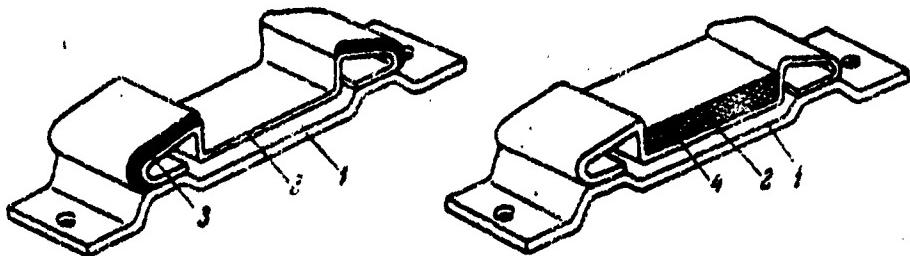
Vibration isolation mount of strip spring steel for shipboard machinery.
